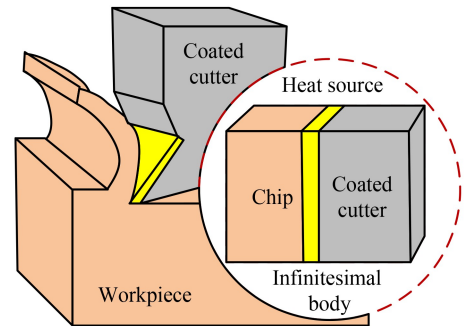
Coated tool cutting and machining of infinitesimal element.
